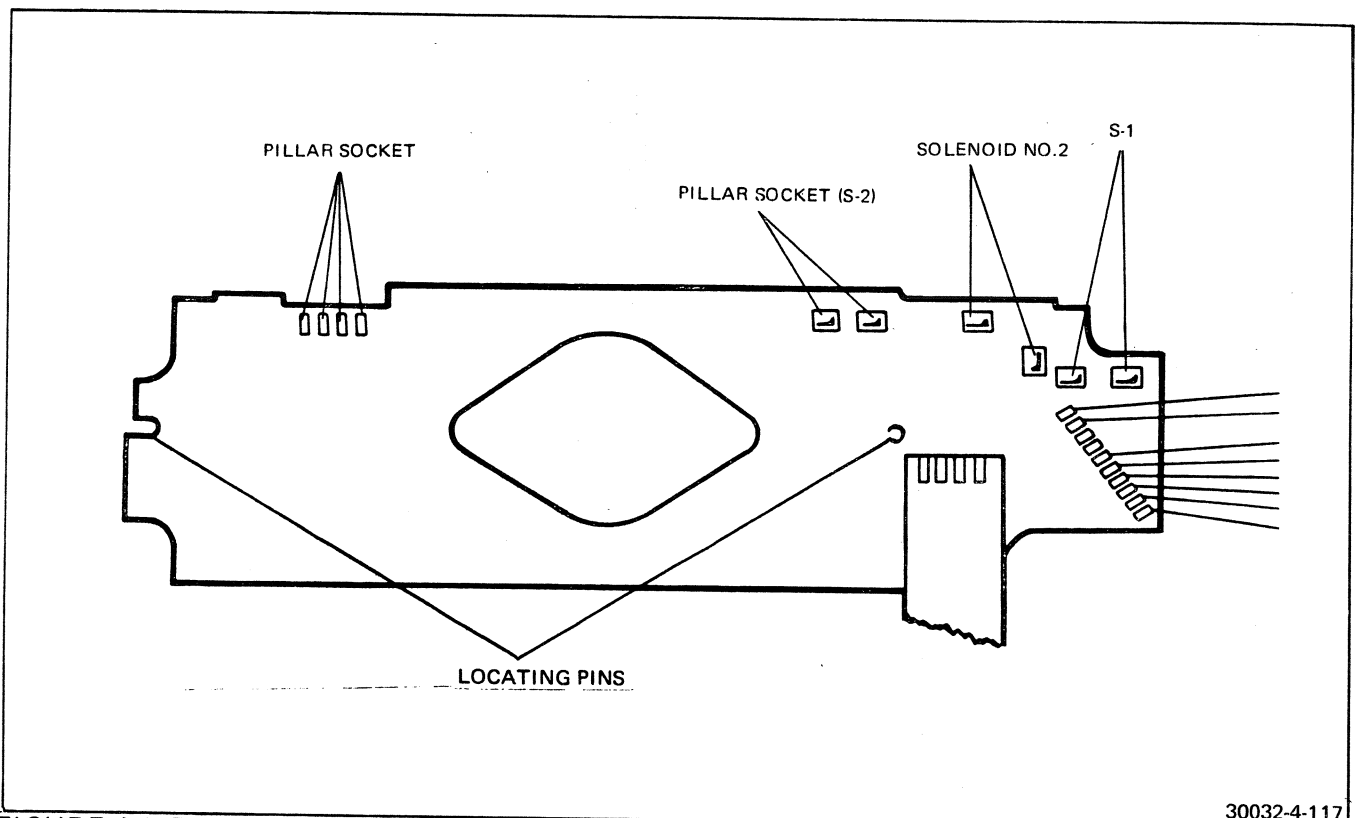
SUBSTRATE SOLDER CONNECTIONS
